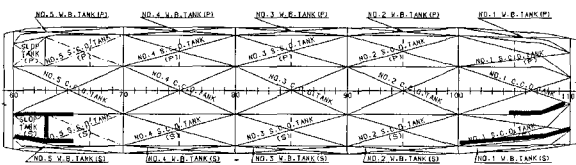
Tank arrangement for straight type inside longitudinal bulkhead
